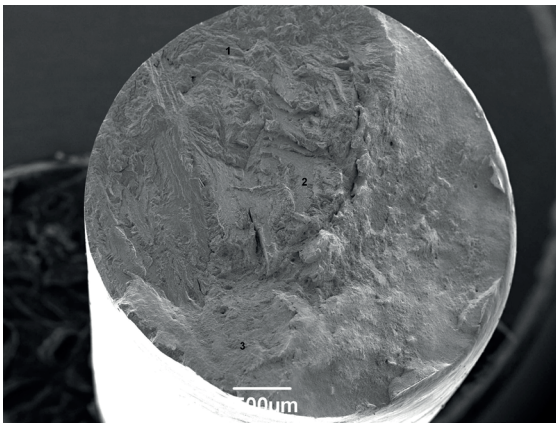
Overall appearance of the fracture area of welded joint, load 74 % $R_{p0.2}$, time to rupture 12.10 h
